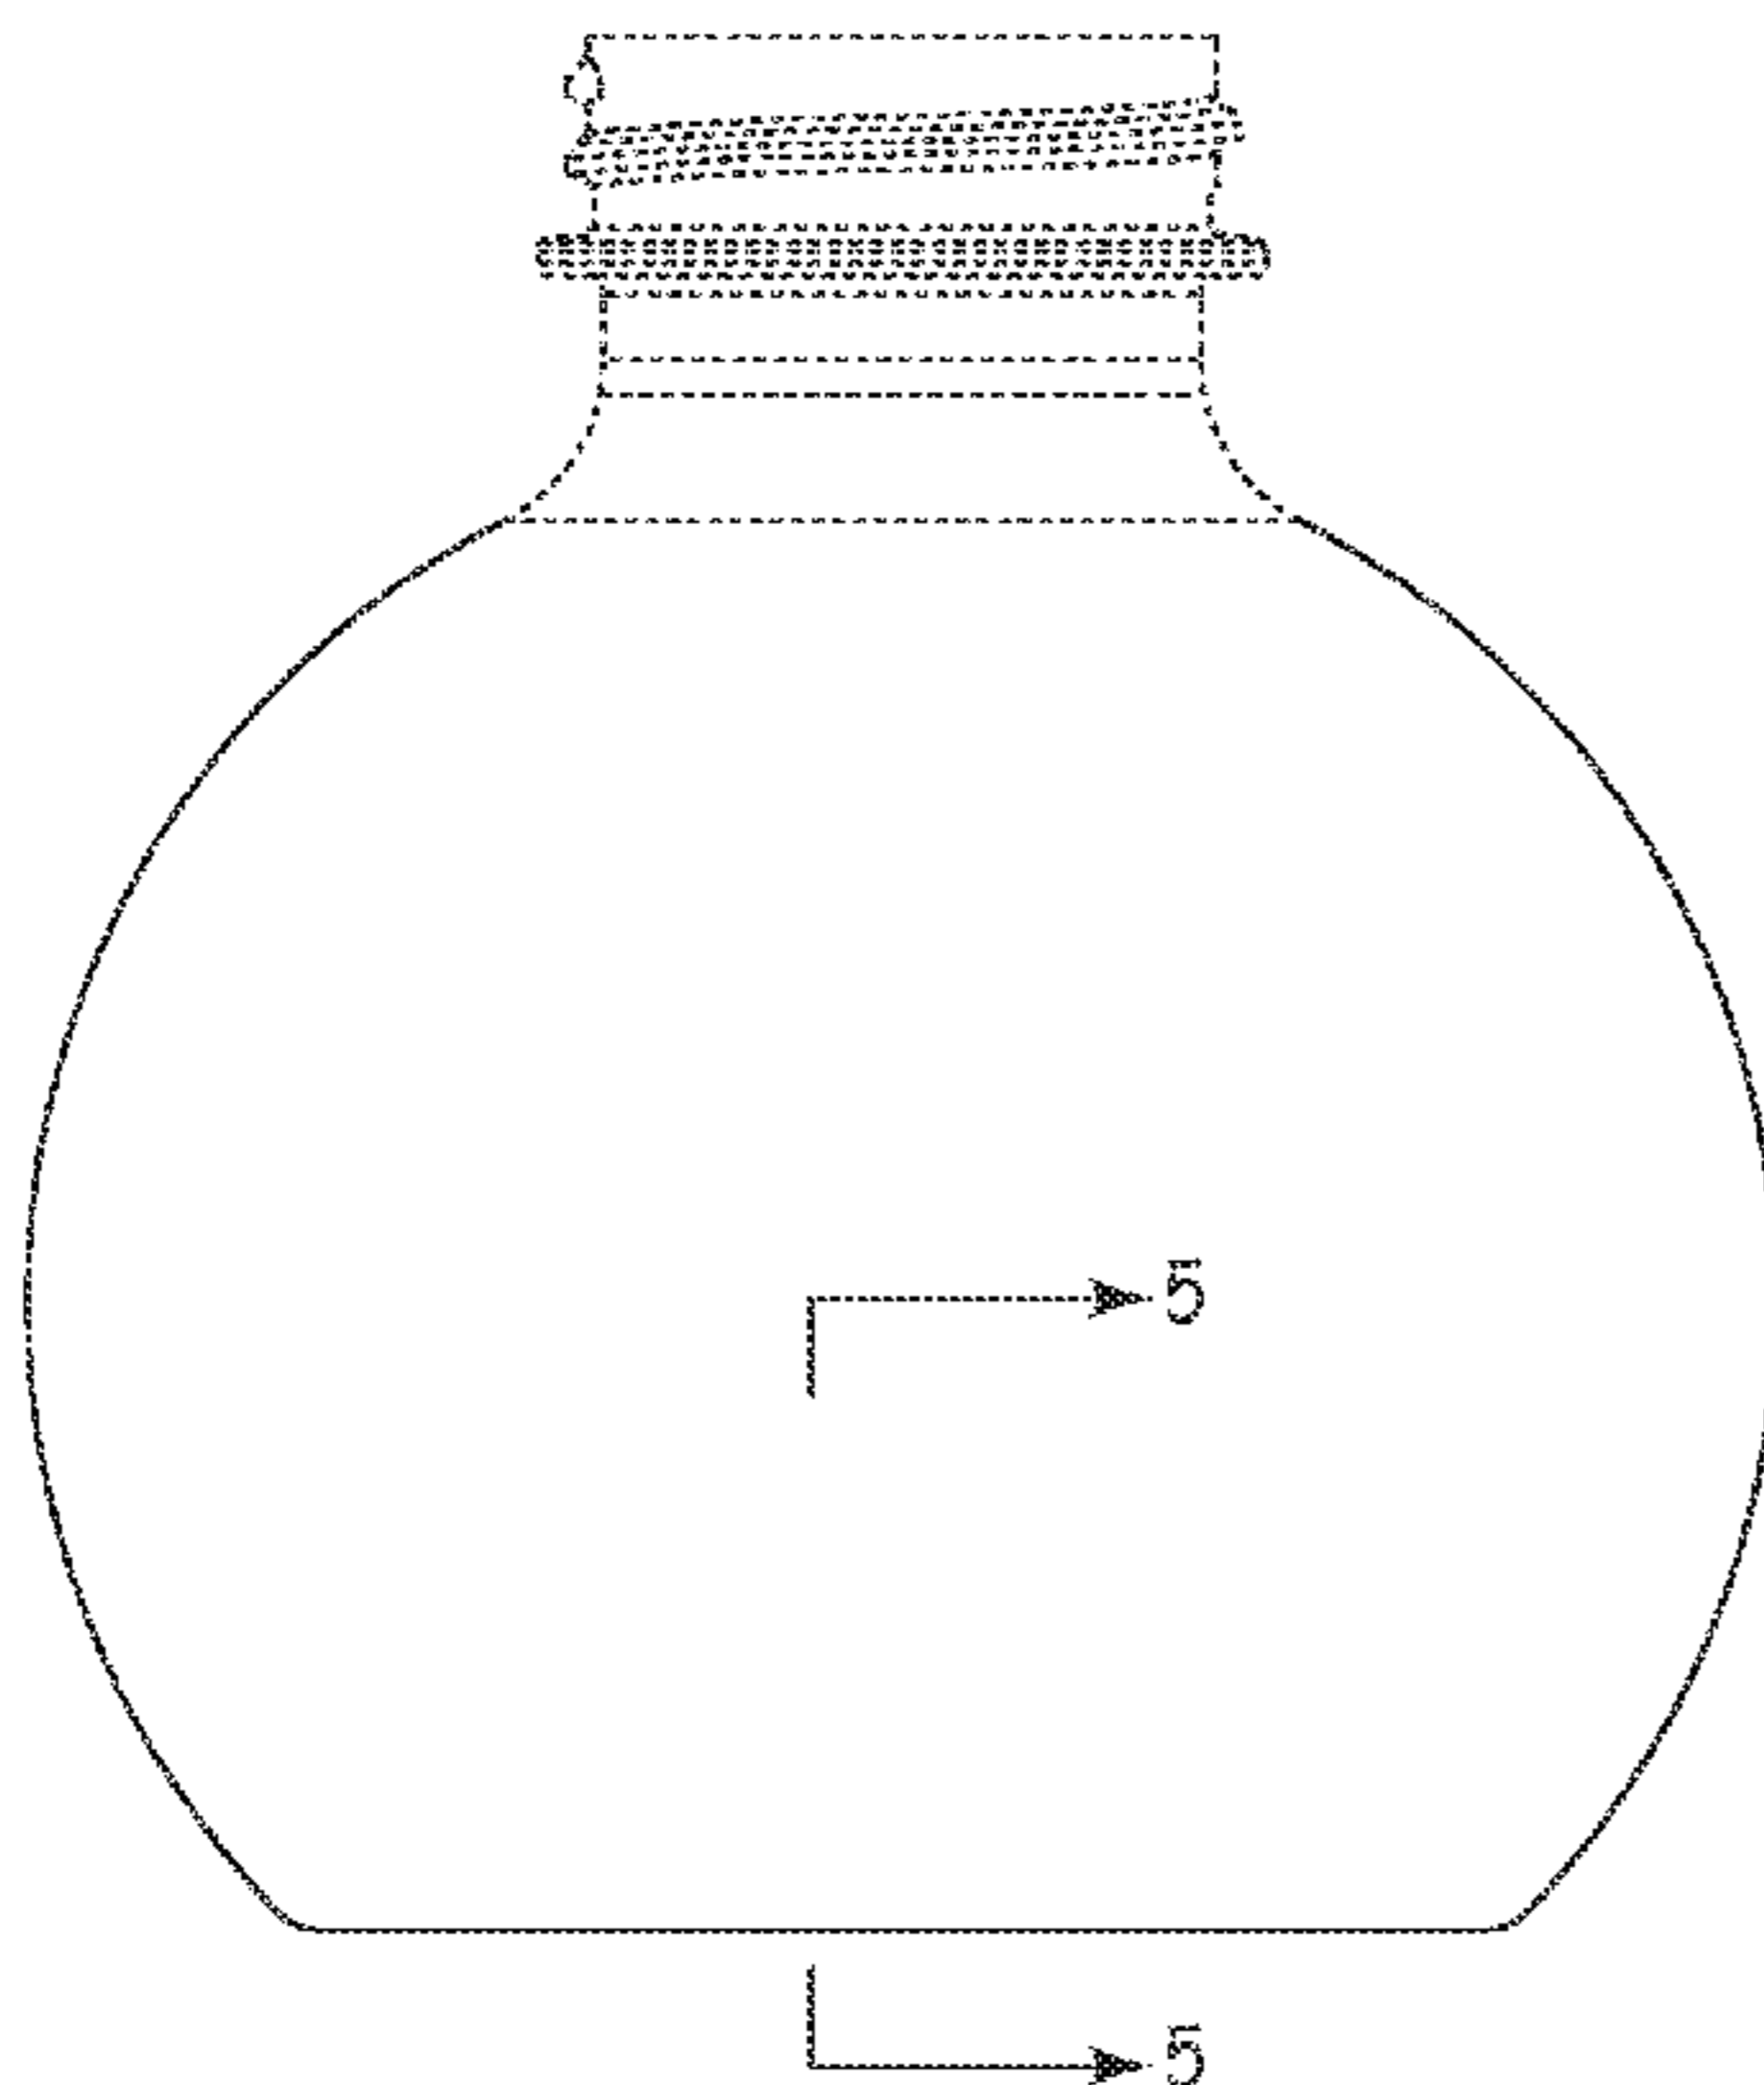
is a side view of the ball-shaped bottle with a secondary cavity.
